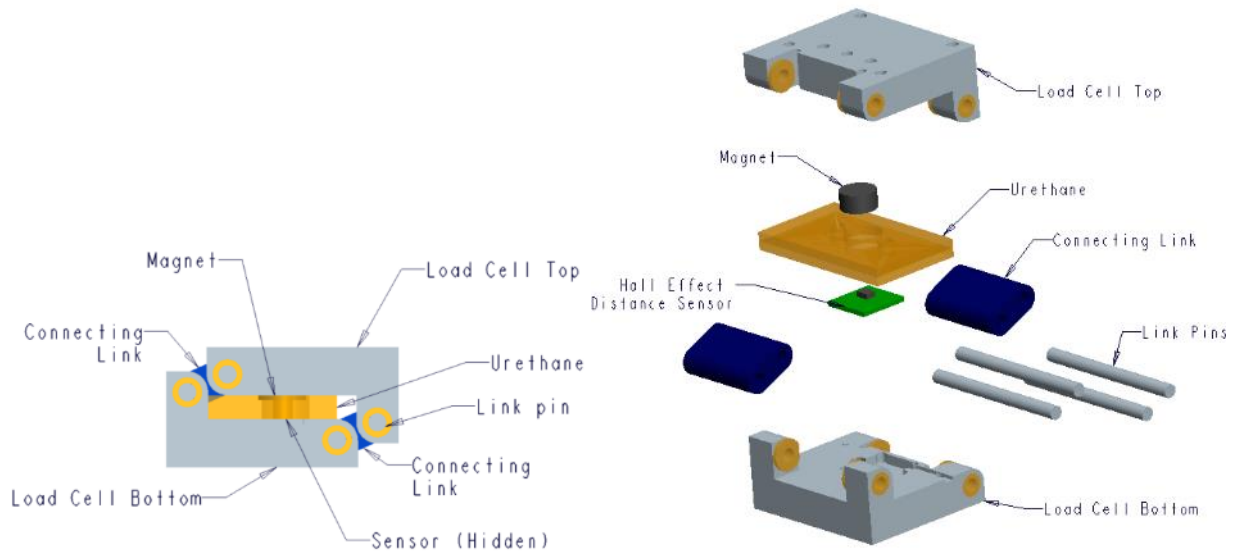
CAD models of load cell showing a side view (left) and exploded view (right).
